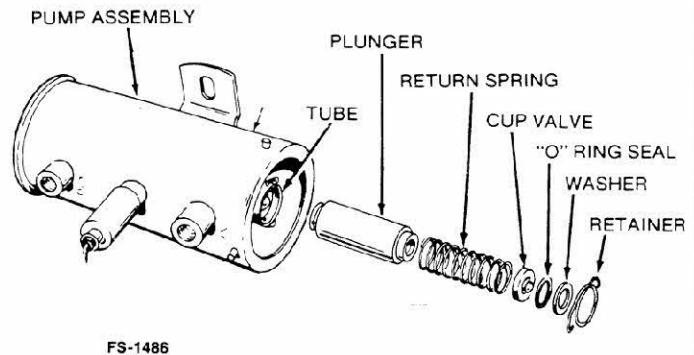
REMOVAL OF PLUNGER ASSEMBLY
